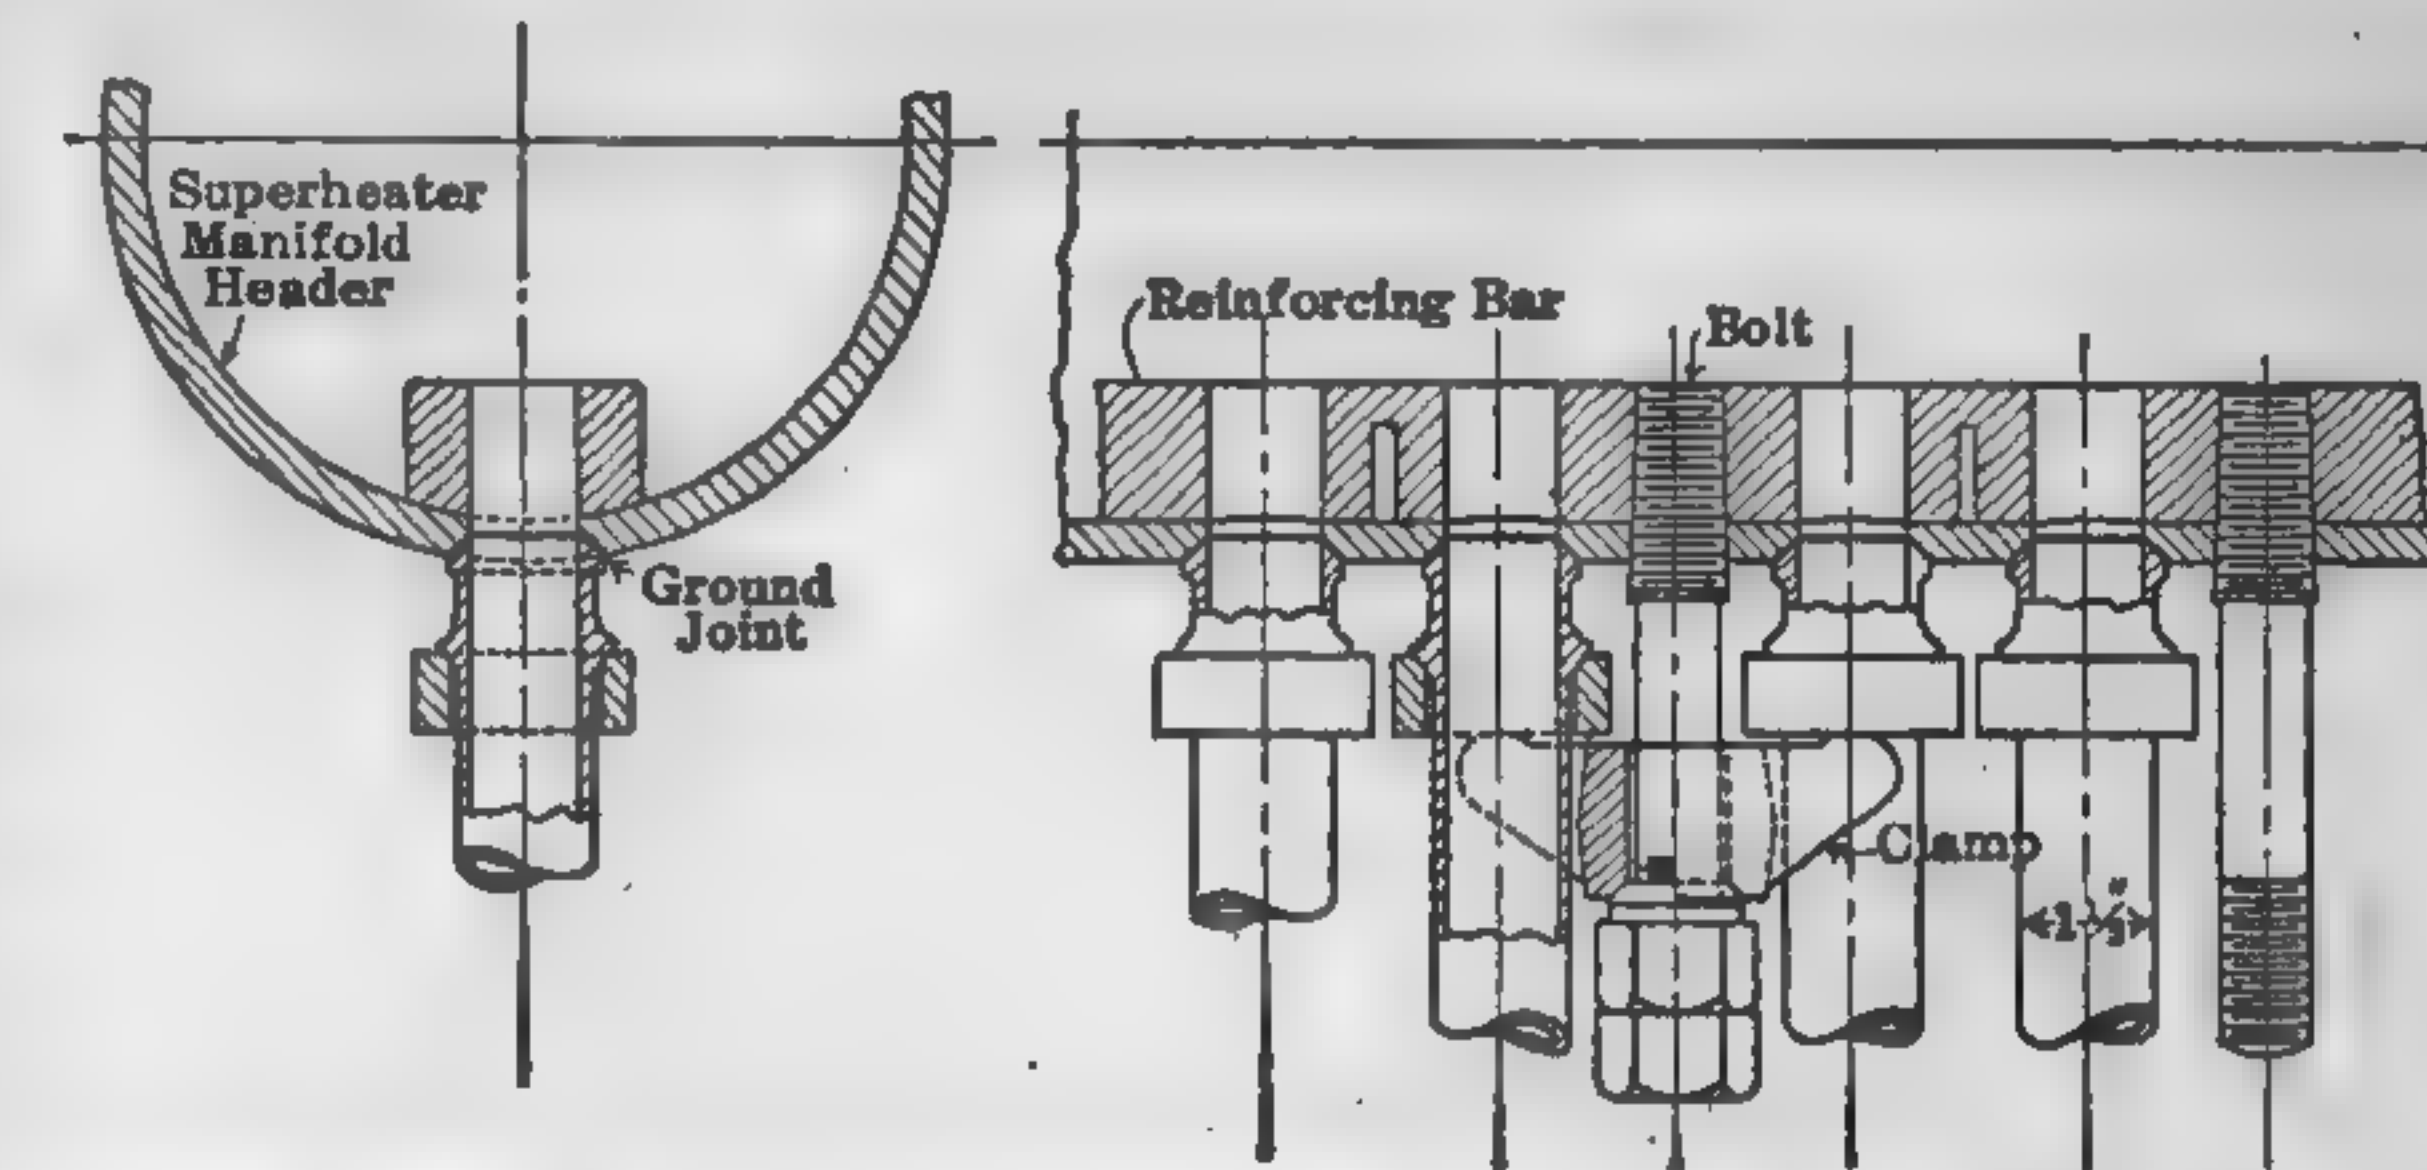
Method of Securing Tubes to Header — Elesco Superheater.
